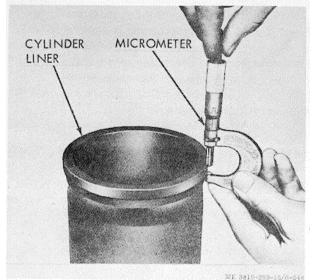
Inspecting liner flange height- outside bead.
